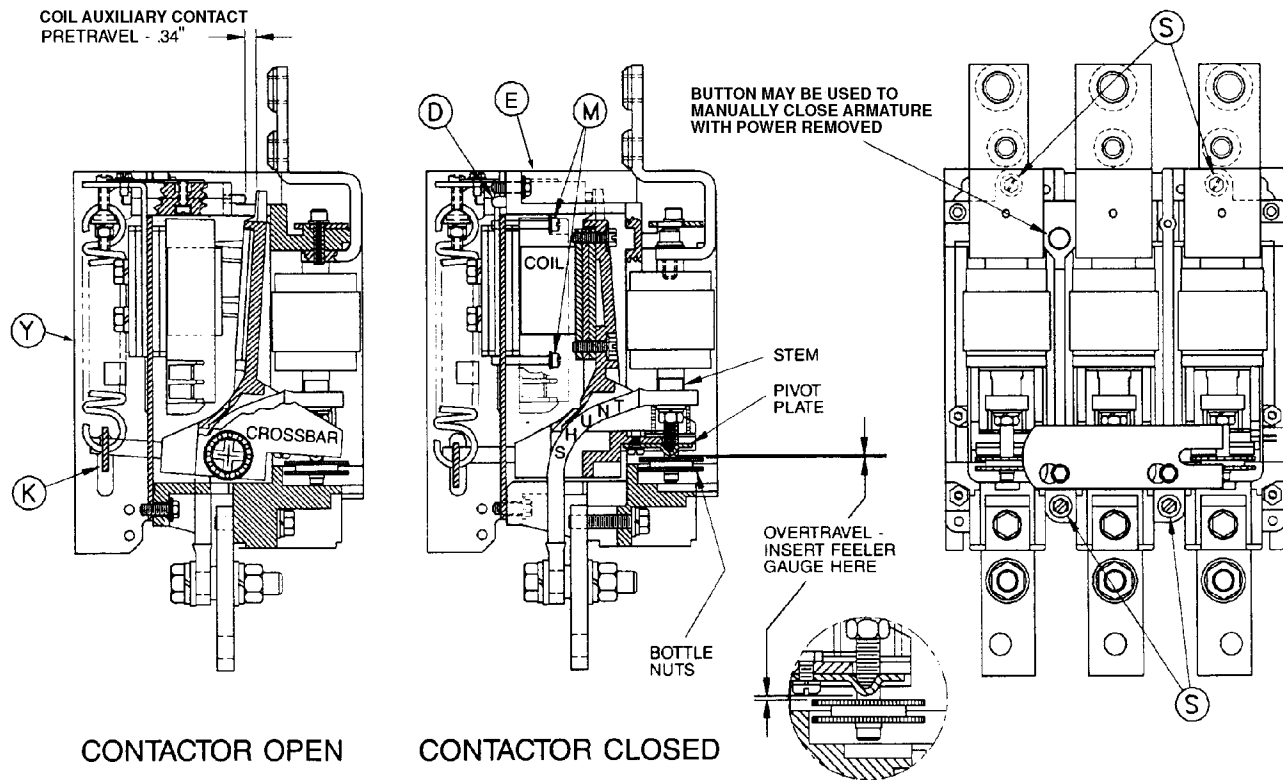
Size 6 Vacuum Contactor, Class 8502 Type WHO
